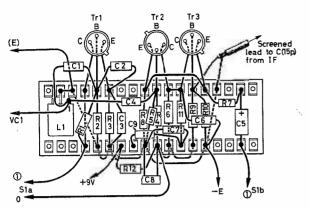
Panel board for the b.f.o./product detector. Pin 3 of L1 is soldered directly to a tag which acts as a support for L1.
